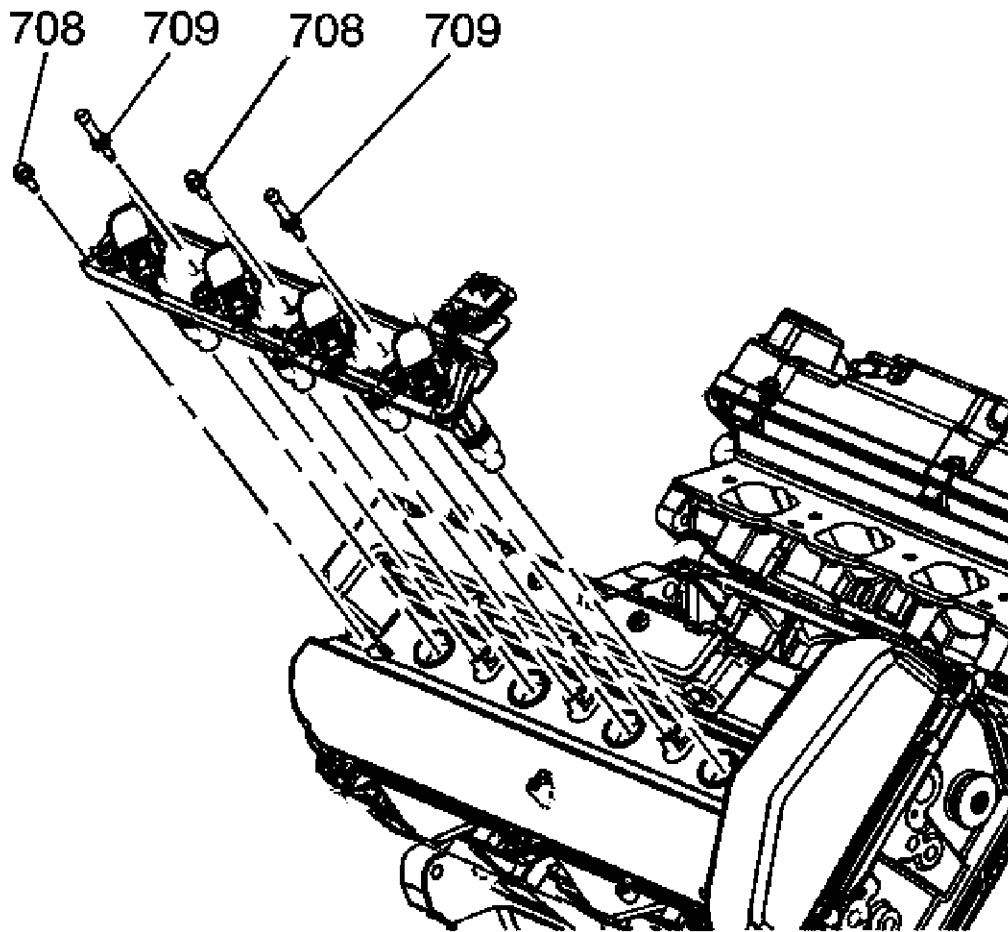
Identifying Ignition Coil Assembly Bolts & Ball Studs
